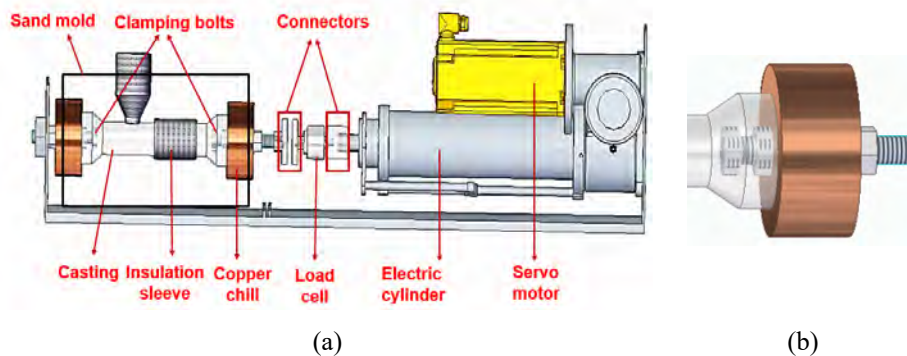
(a) Schematic of the Controlled Deformation Test (CDT) setup showing the main components of this apparatus, and (b) a detailed view of the attachment between the clamping bolts and the copper chill.
